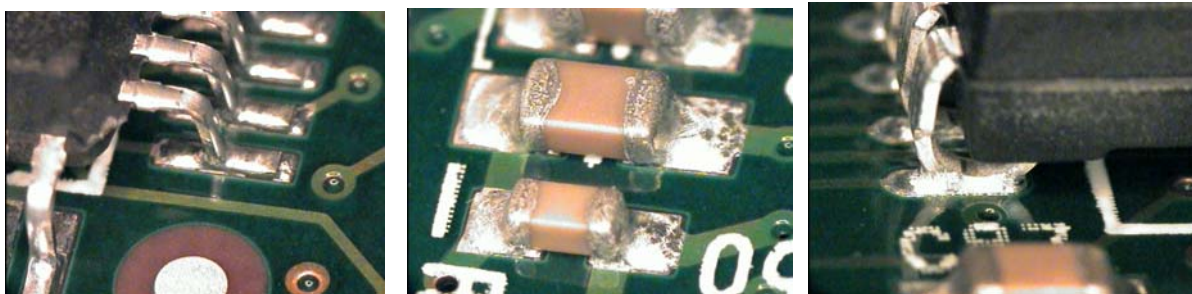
Various SMD parts soldered well with SAC305; all met IPC-610 Class 1, 2, 3
